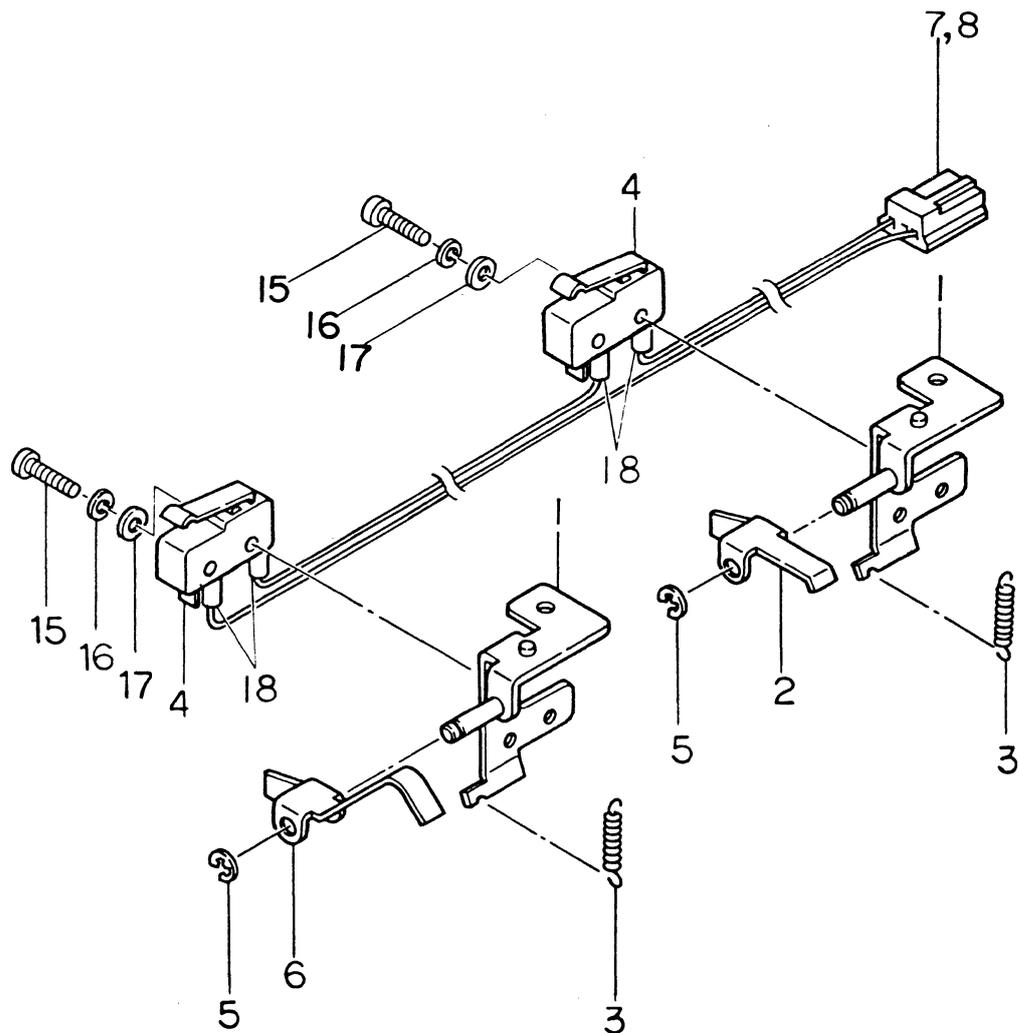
Paper Out Assembly (4LR-129907-1)
